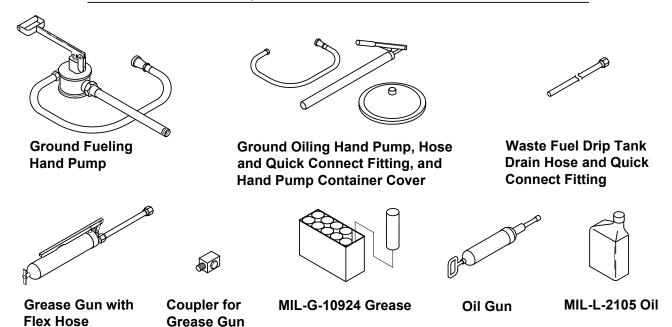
Pile Driver System Pre-Assembly Inventory Components (Sheet 2 of 4)
